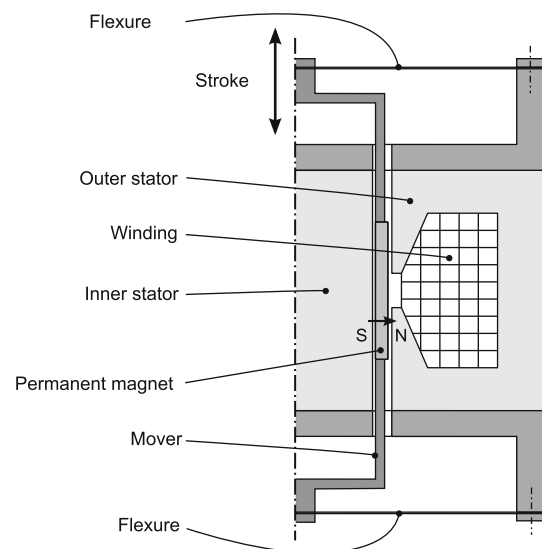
Schematic cross-sectional view of the *cylindrical* feed unit
